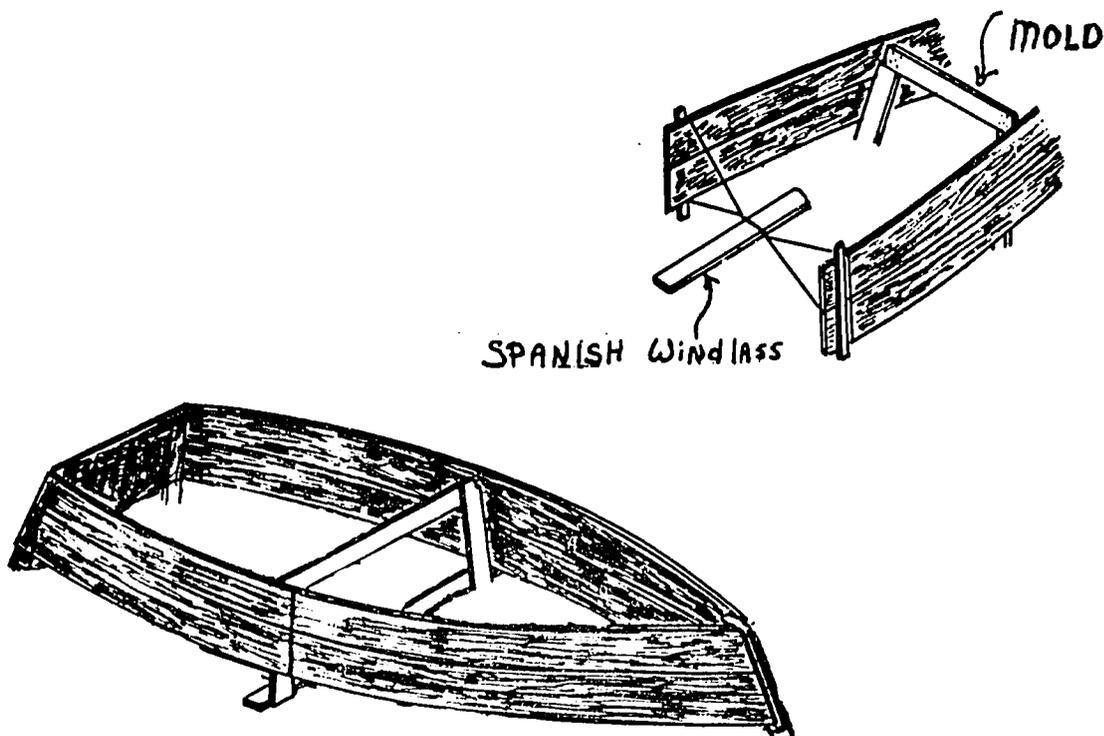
ATTACHING SIDES TO STEM AND TRANSOM
